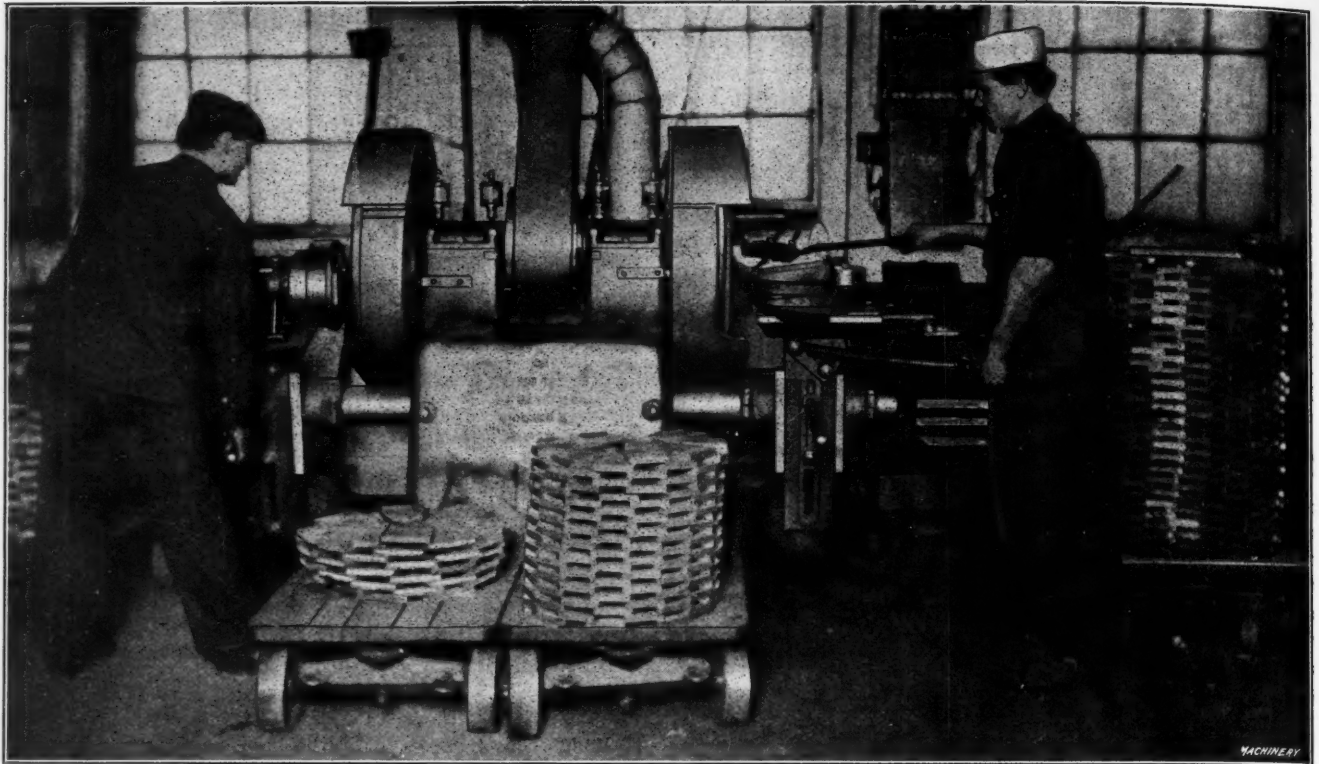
Finishing Sad Irons on a Ring-wheel Grinder
